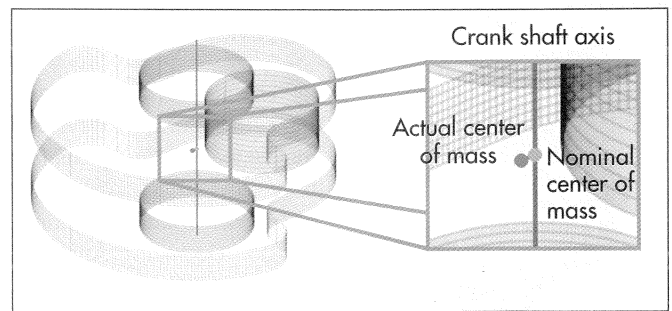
Determination of the deviation of the center of mass of a machined one-cylinder crank shaft using optical measuring data
